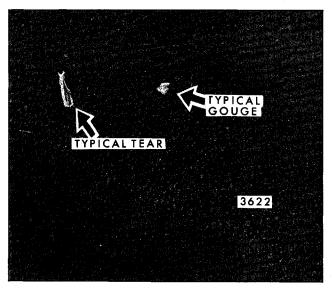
Typical Fabric Roof Cover Discrepancy
